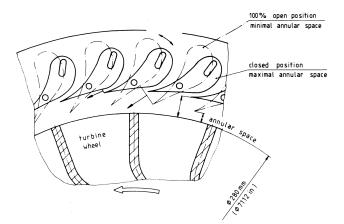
Change of Annular Space between Nozzles and Turbine Wheel with Nozzle Position.
